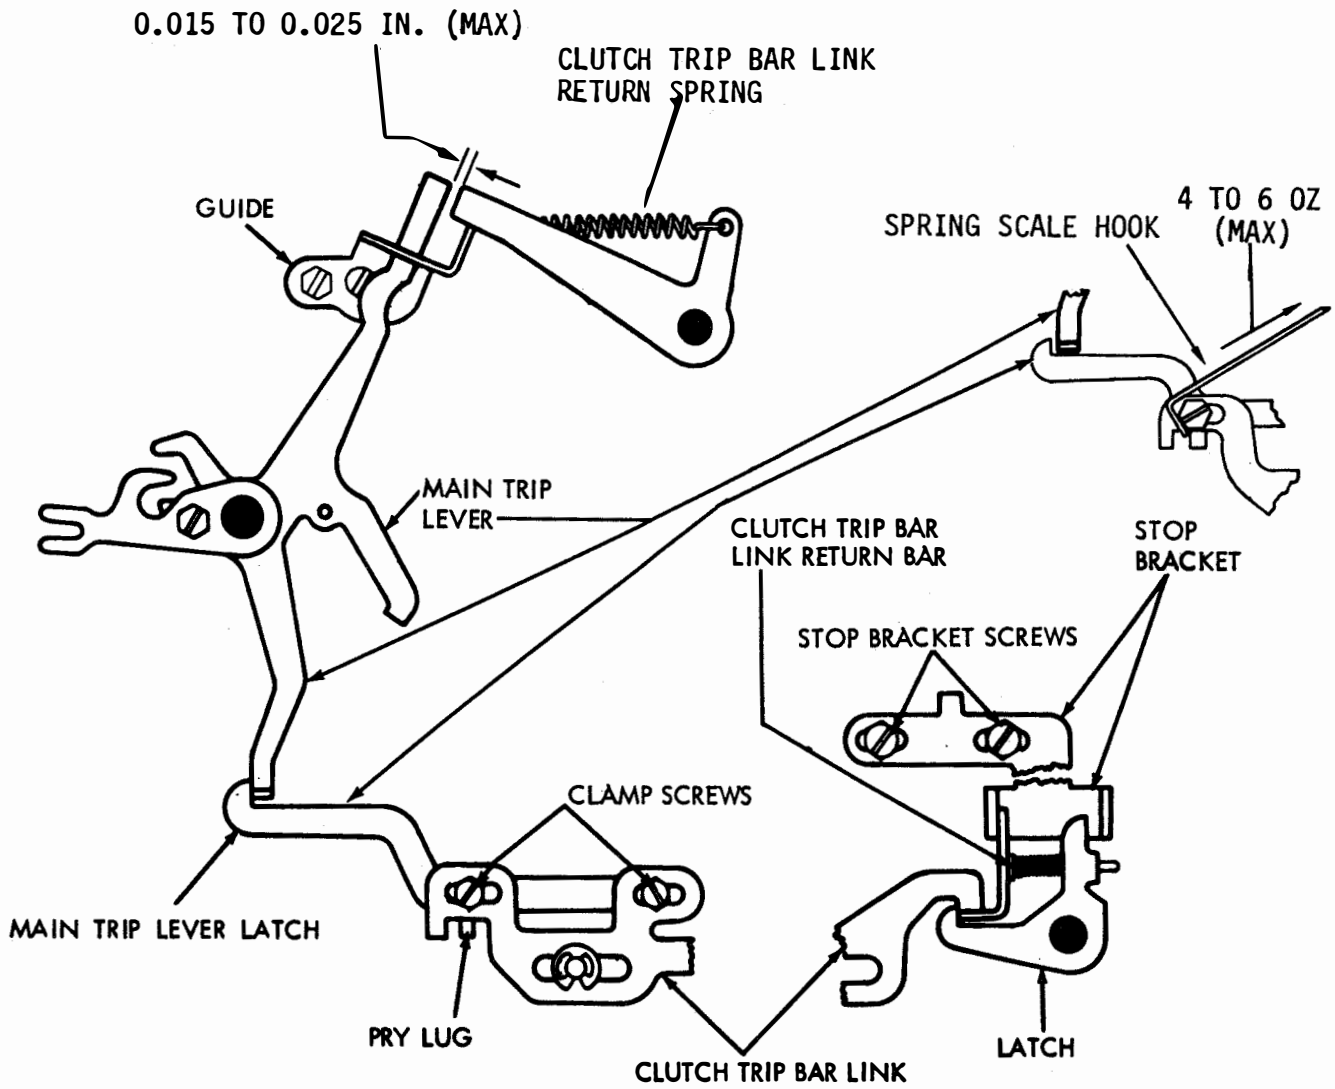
Perforator Clutch Release Trip and Trip Bar Link Return Spring
